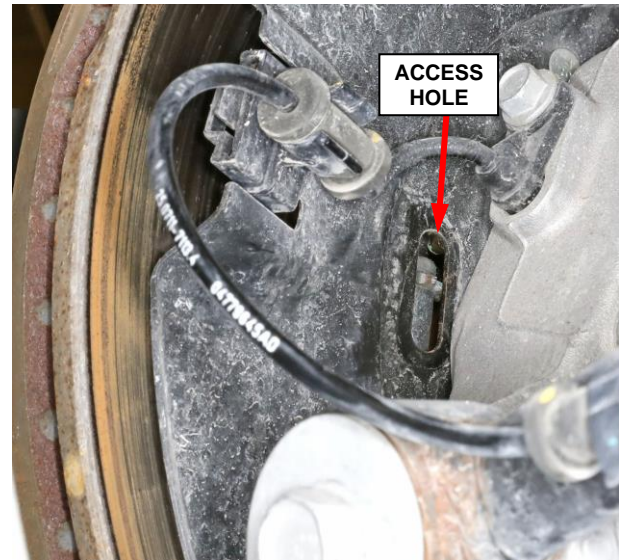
Access Hole with Plug Removed (Star-wheel visible)
